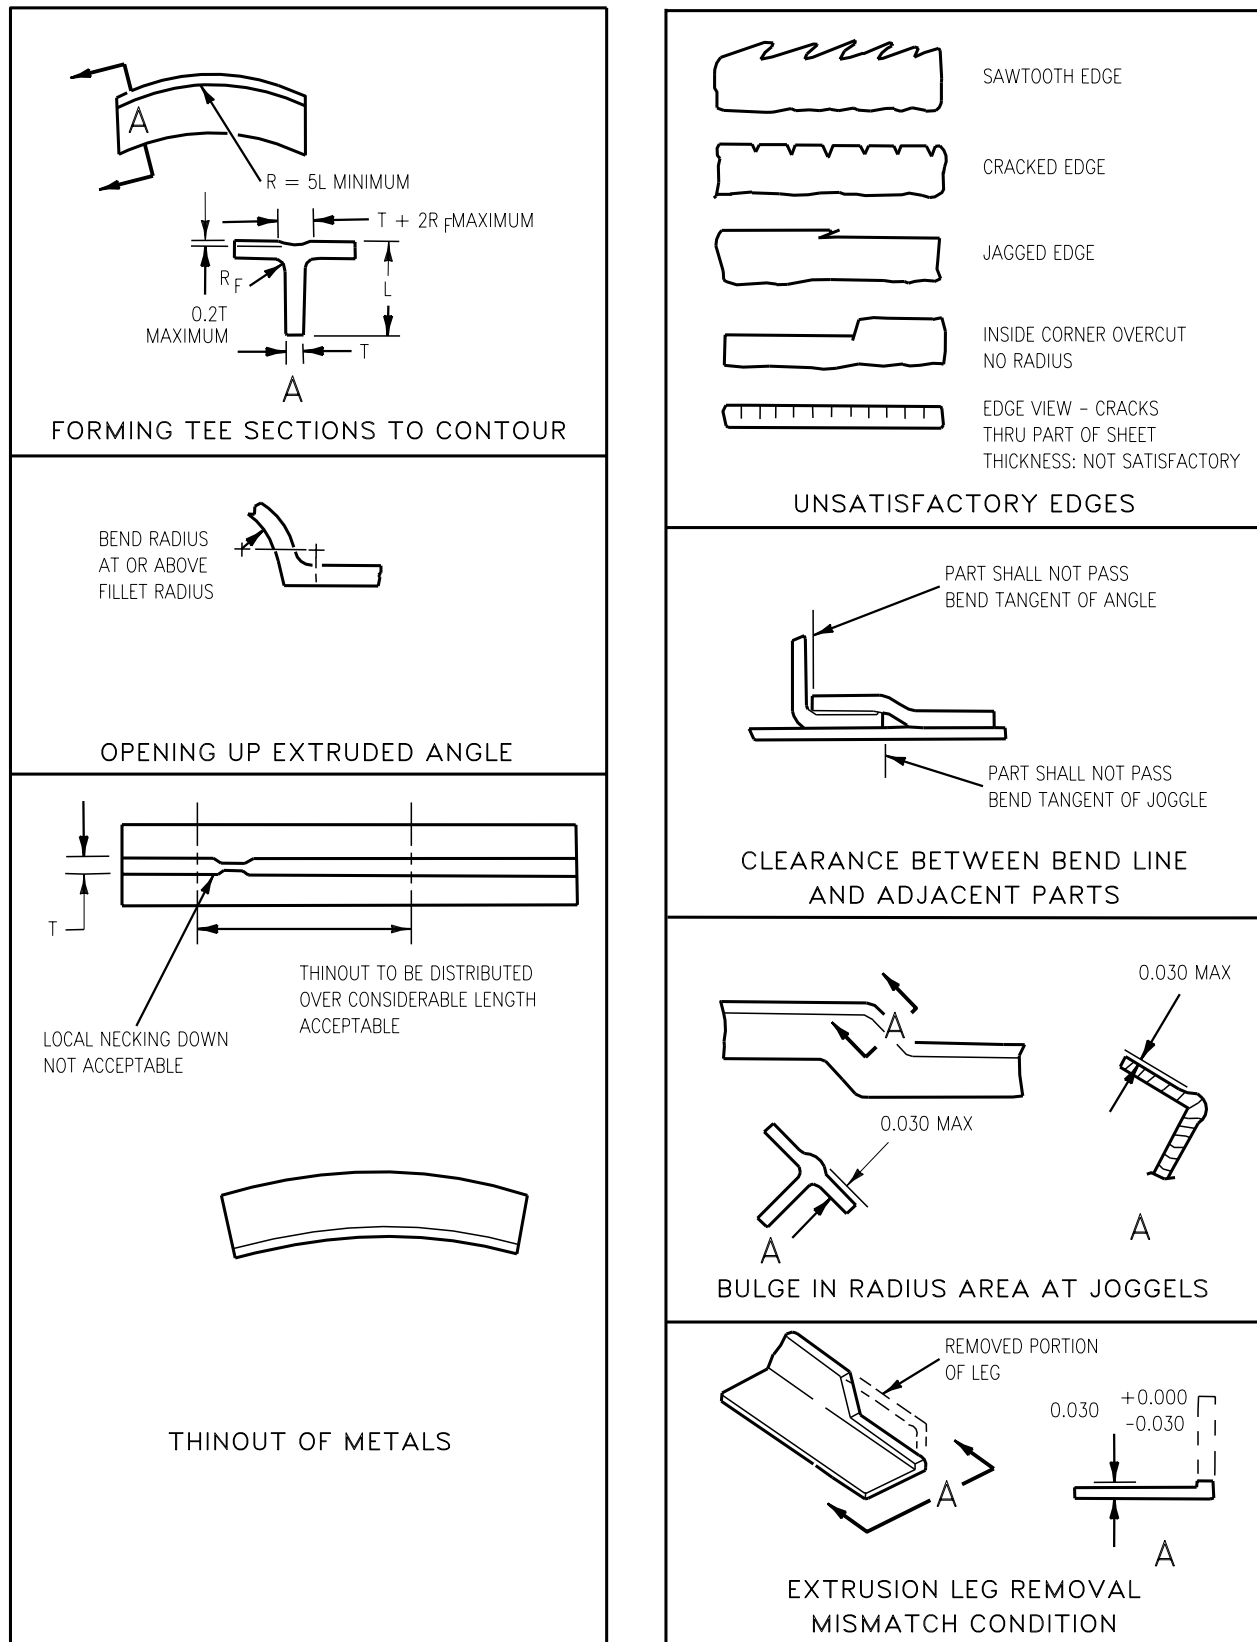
Sheet Metal Inspection Requirements (Sheet 2)
